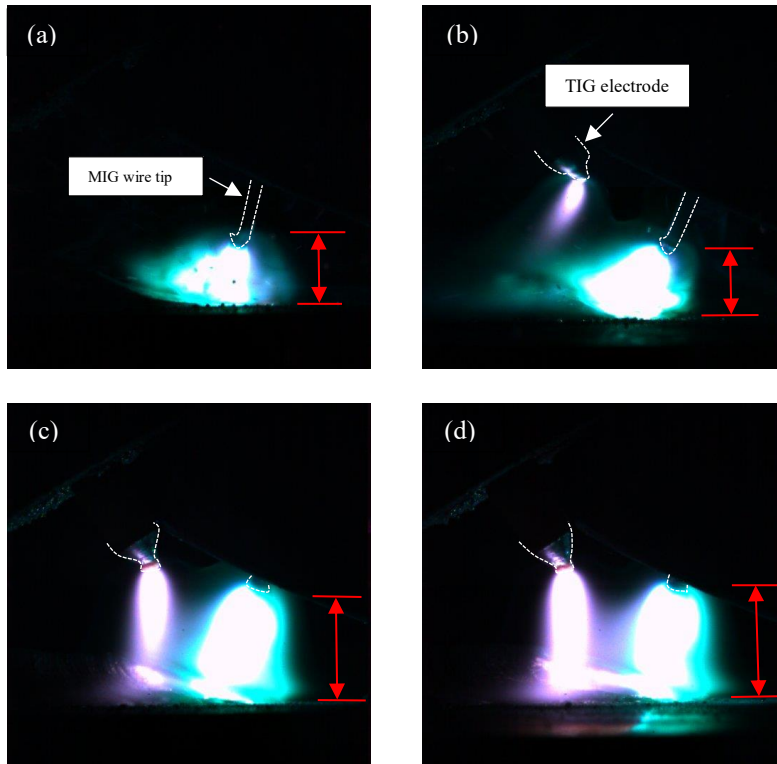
Influence of TIG current on MIG arc length (a) MIG welding (b) MIG140A/TIG60A hybrid welding (c) MIG140A/TIG100A hybrid welding (d) MIG140A/TIG120A hybrid welding
